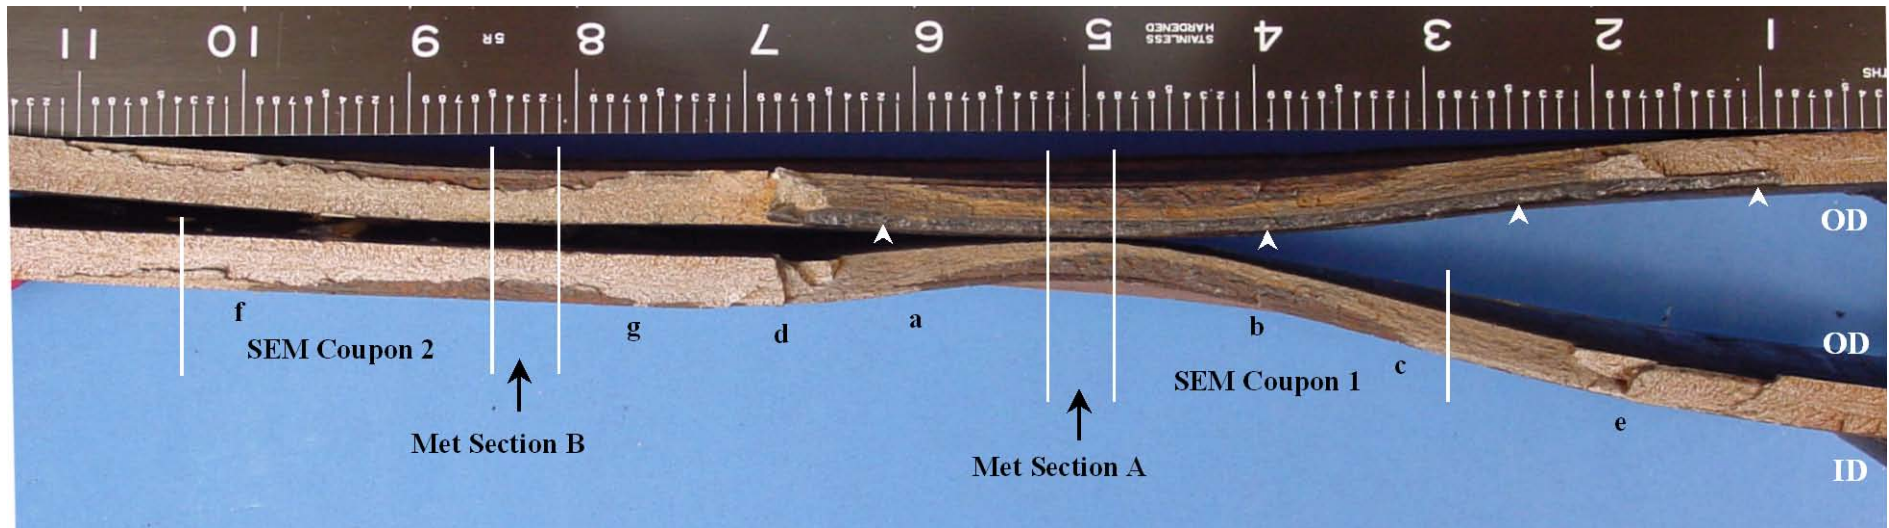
Fracture Surfaces of Fatigue Case Number 4 Anomaly
